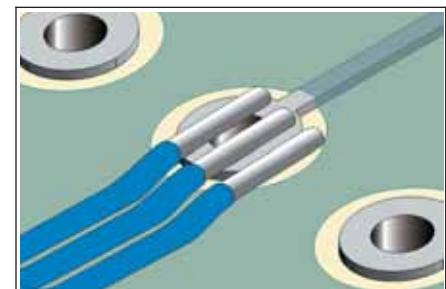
Not Recommended Multiple wires overhanging pad edge.
